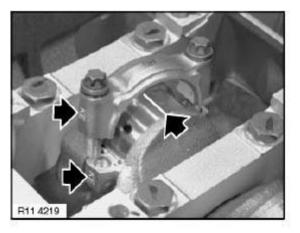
Identifying Connecting Rod Bearing Courtesy of BMW OF NORTH AMERICA, INC.
